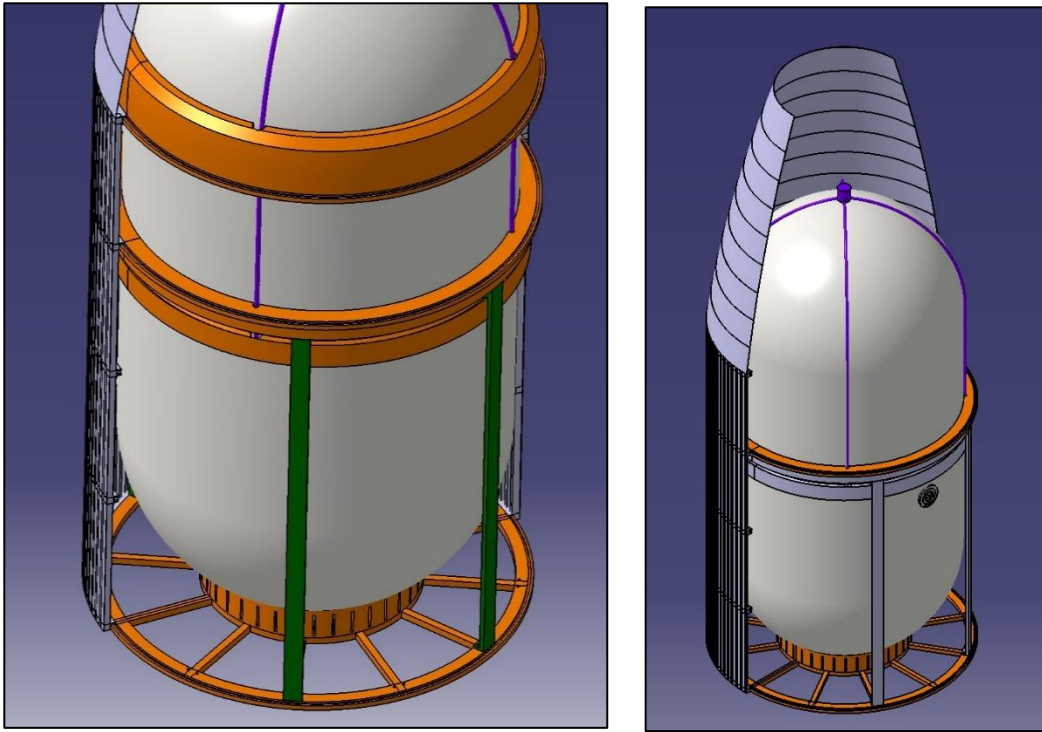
Hydrogen Tank with Cuff Truss Attached. The Original Fixture Designs (Left) and the Revised Version of Fixtures Design (Right)
